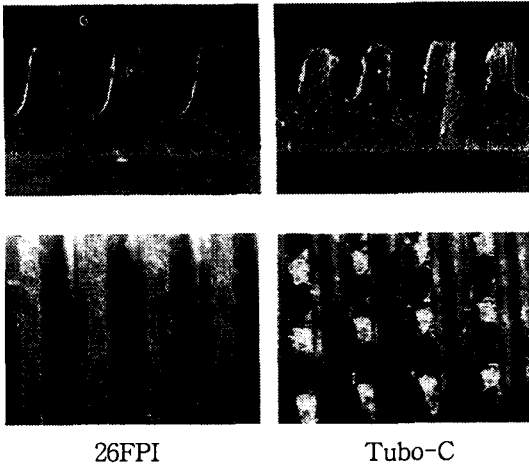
Cross sections and surfaces of Integral Low Fin Tube and Turbo-C Tube
